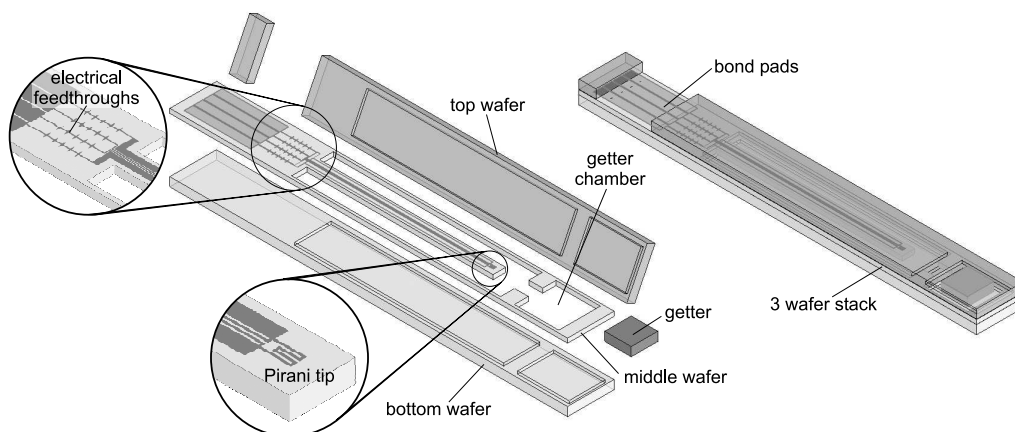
3 dimensional schematic of of the micro vacuum chamber. Left: exploded view, right: assembly.
